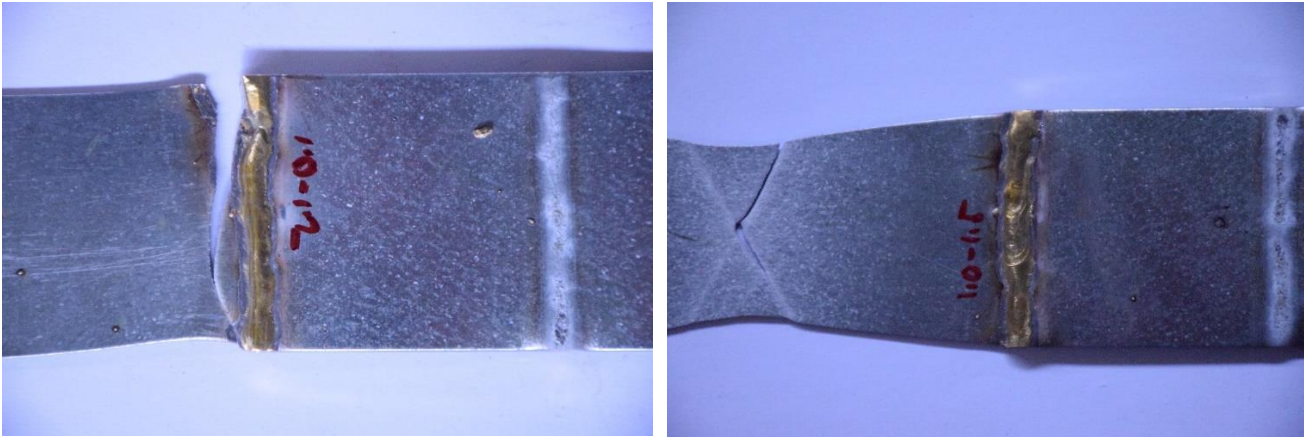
Failure modes of CMT-1.0-1.5 specimens
